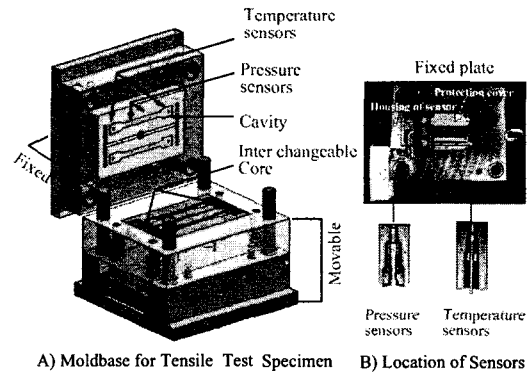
Designed injection mold and mold-base with sensors for tensile test specimen
